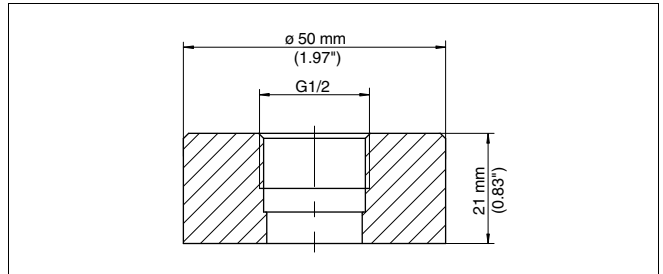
Dimensions welded socket G $\frac{1}{2}$  B acc. to ISO 228-1 - vessel
